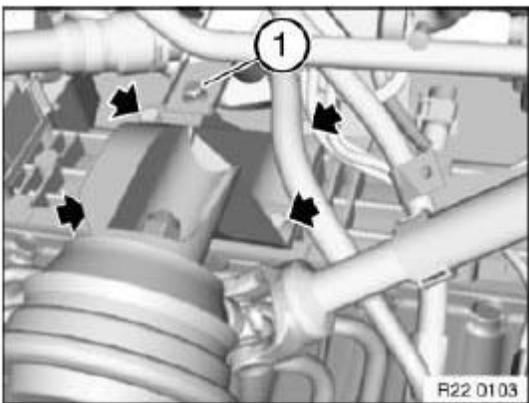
Identifying Screws And Power Steering Expansion Tank
